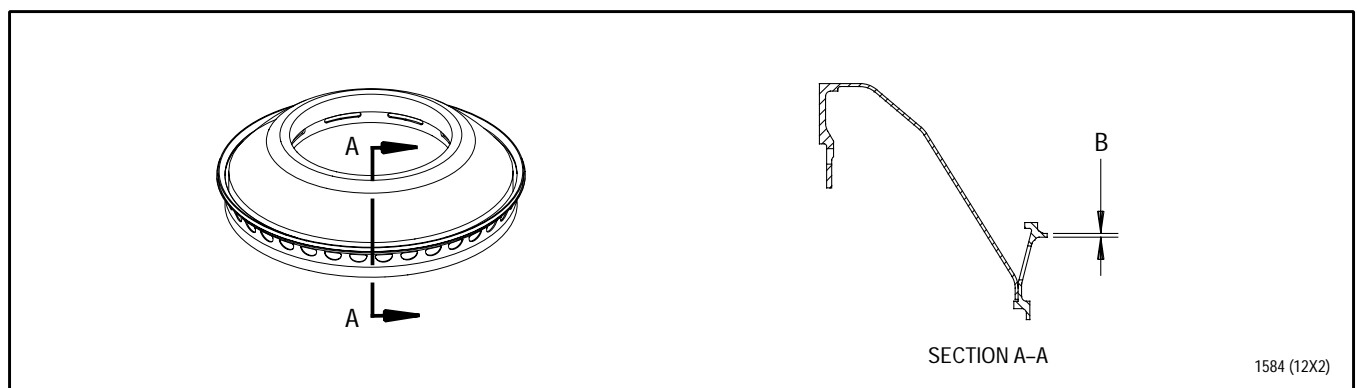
Dimension B- No. 4 Bearing Rear Air Seal Ring Seating Flange Thickness
